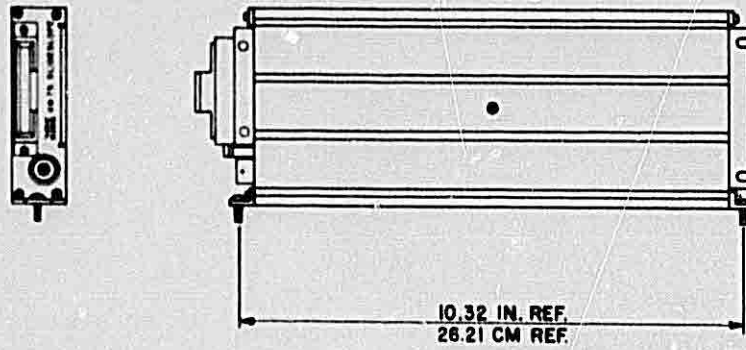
KN 75 OUTLINE AND MOUNTING DRAWING
